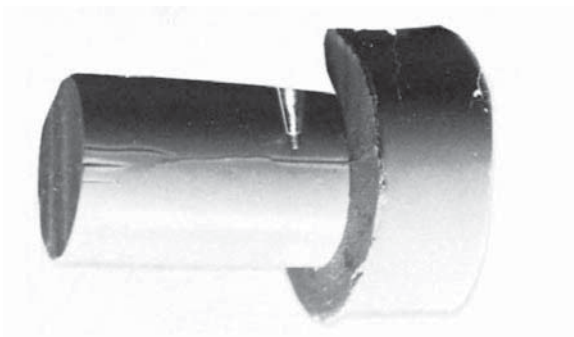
MAGNETIC RUBBER INDICATIONS OF SURFACE CRACKS IN AIRCRAFT FASTENER HOLES
